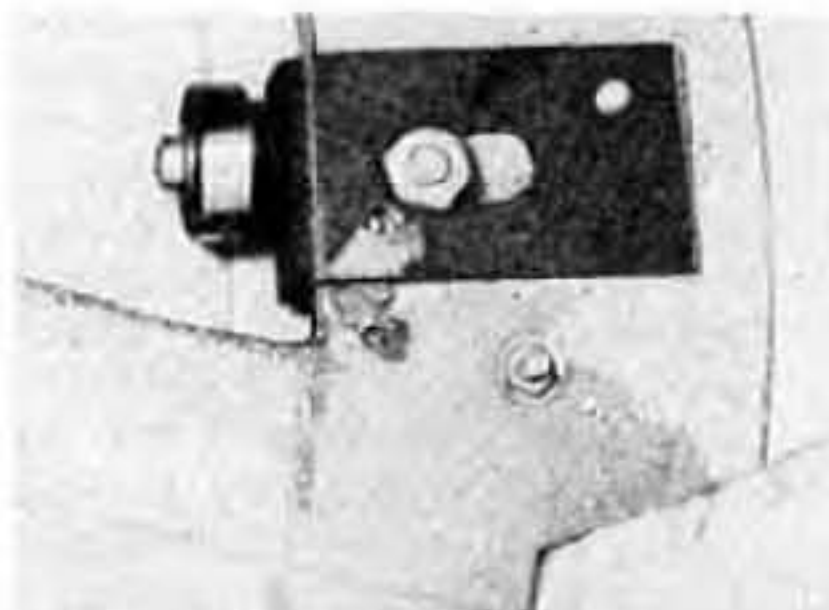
BALL-BEARING WHEELS mounted on bottom bulkhead support body as it rotates.
